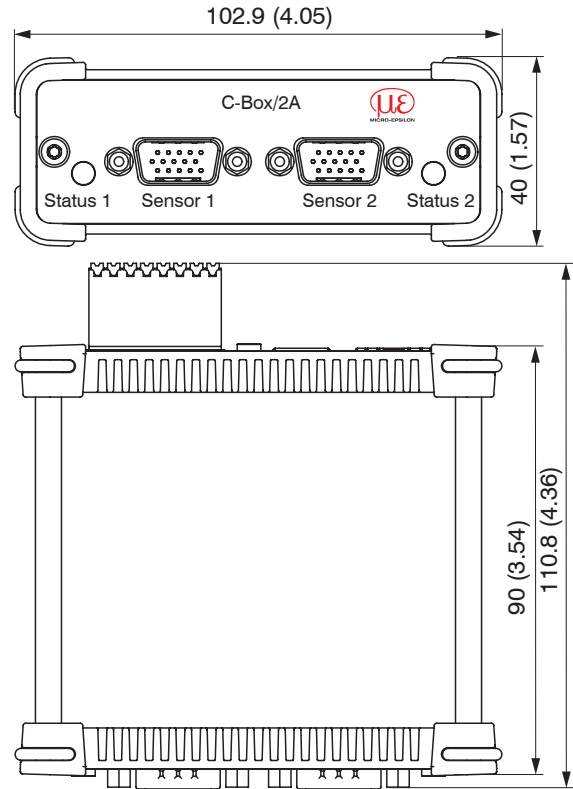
Dimensions C-Box/2A, dimensions in mm (inches), not to scale
